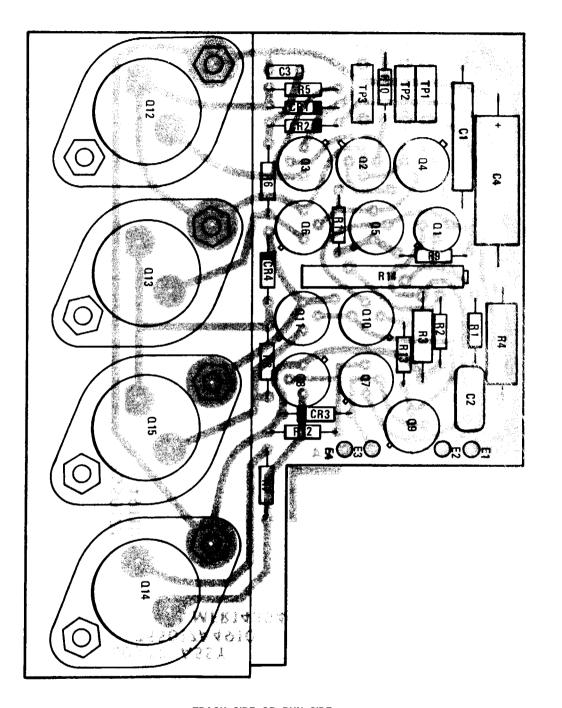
Static Power Inverter Assembly 1A12, PN 755017A4900 (Sheet 1 of 2)
